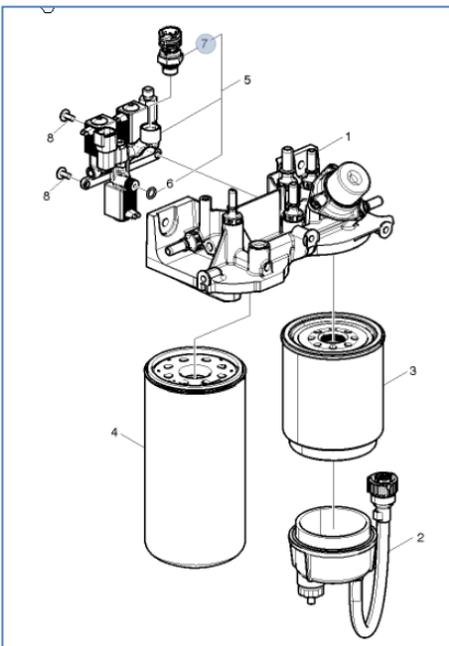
FUEL FILTER HOUSING - VOLVO D13 US17 AND NEWER. REFER TO IMPACT AS DESIGN VARIES
